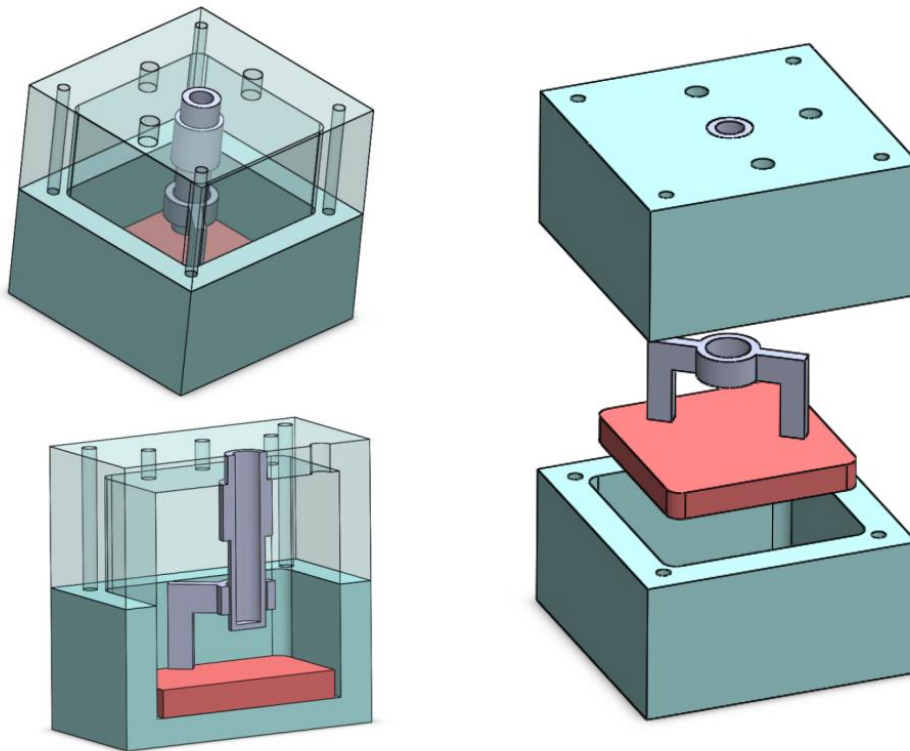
Pre-humidifier - red heating element (aluminium plate, copper wires and thermocouple encapsulated in epoxy from the bottom side) and grey shaft with stirrer in turquoise box (Dassault Systèmes SOLIDWORKS Corp., DTU licence). Technical drawings of the humidifier can be found in appendix C.
